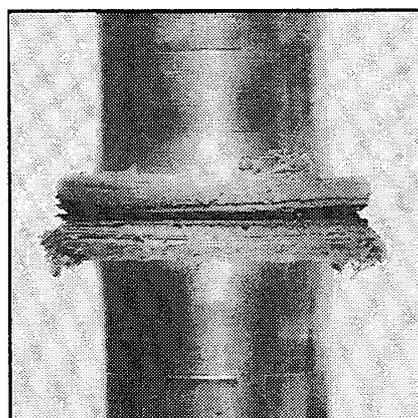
Appearance of friction welded joint of copper alloy
